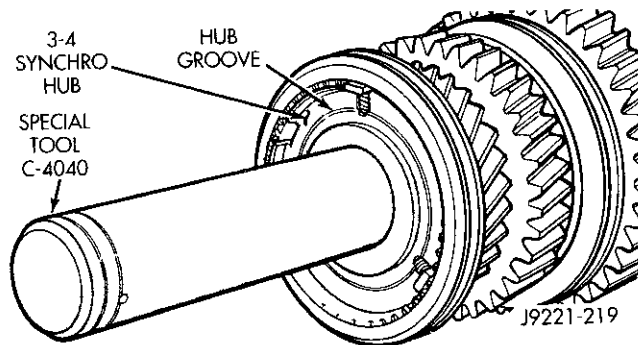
Seating 3-4 Synchro Assembly On Mainshaft
